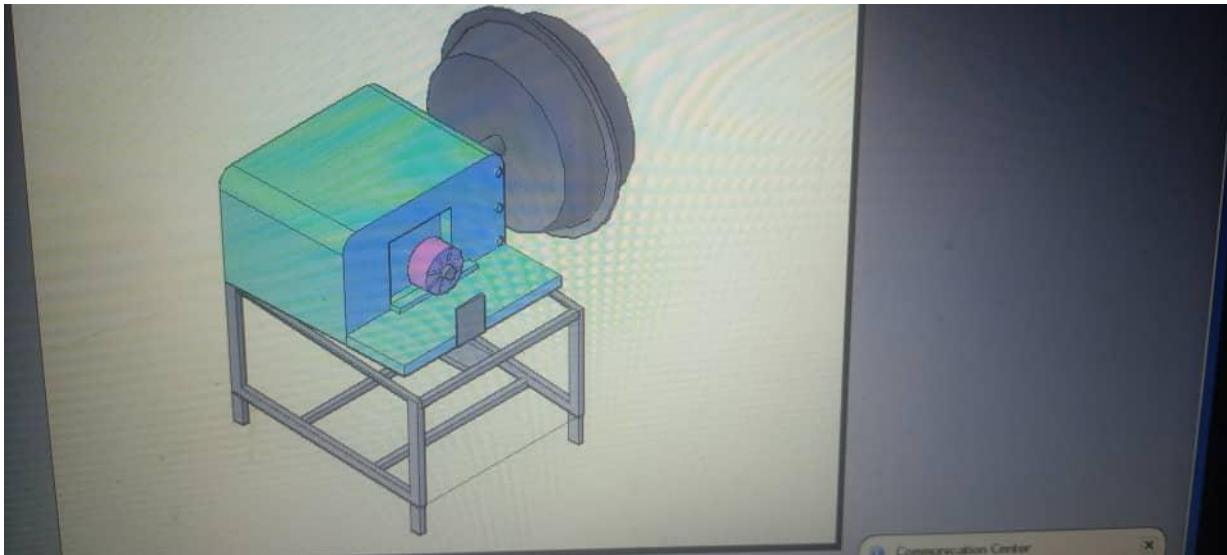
Complete assembly of the peanut mixing machine showing drum, motor, and frame.
